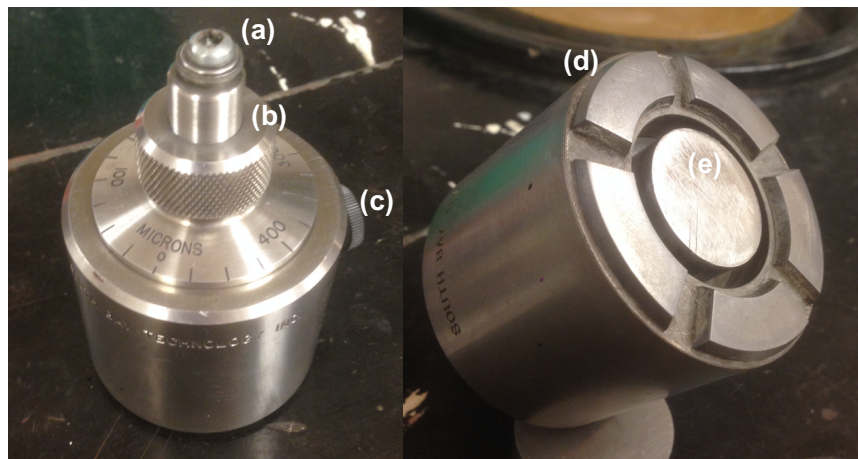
Photograph of South Bay lapping fixture. (a) sample mounting disk screw; (b) micrometer screw and dial; (c) set screw; (d) boron carbide feet; and (e) sample mounting disk.
